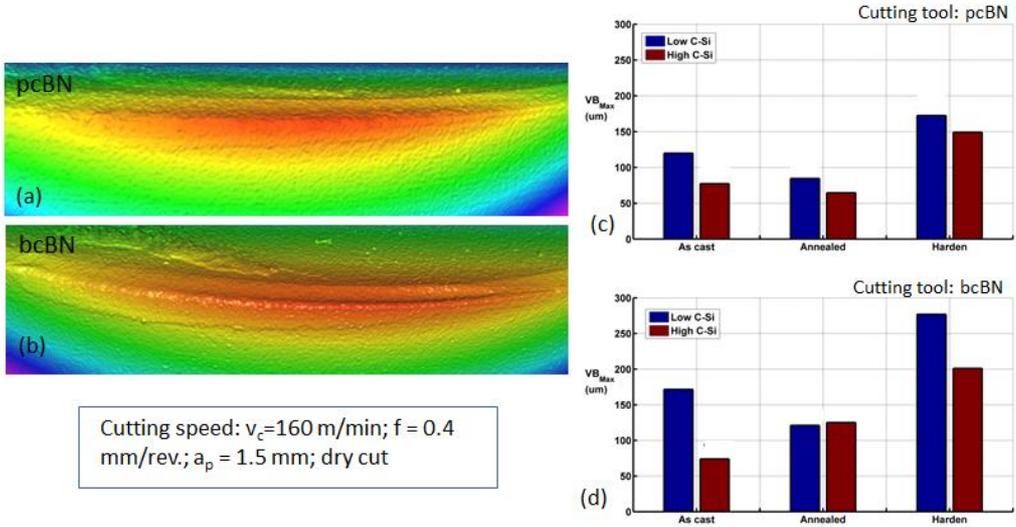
Flank wear and crater wear on pcBN and bcBN cutting tools in (a) and (b); wear rate generated on pcBN and bcBN tools when machining six different materials in (c) and (d).
